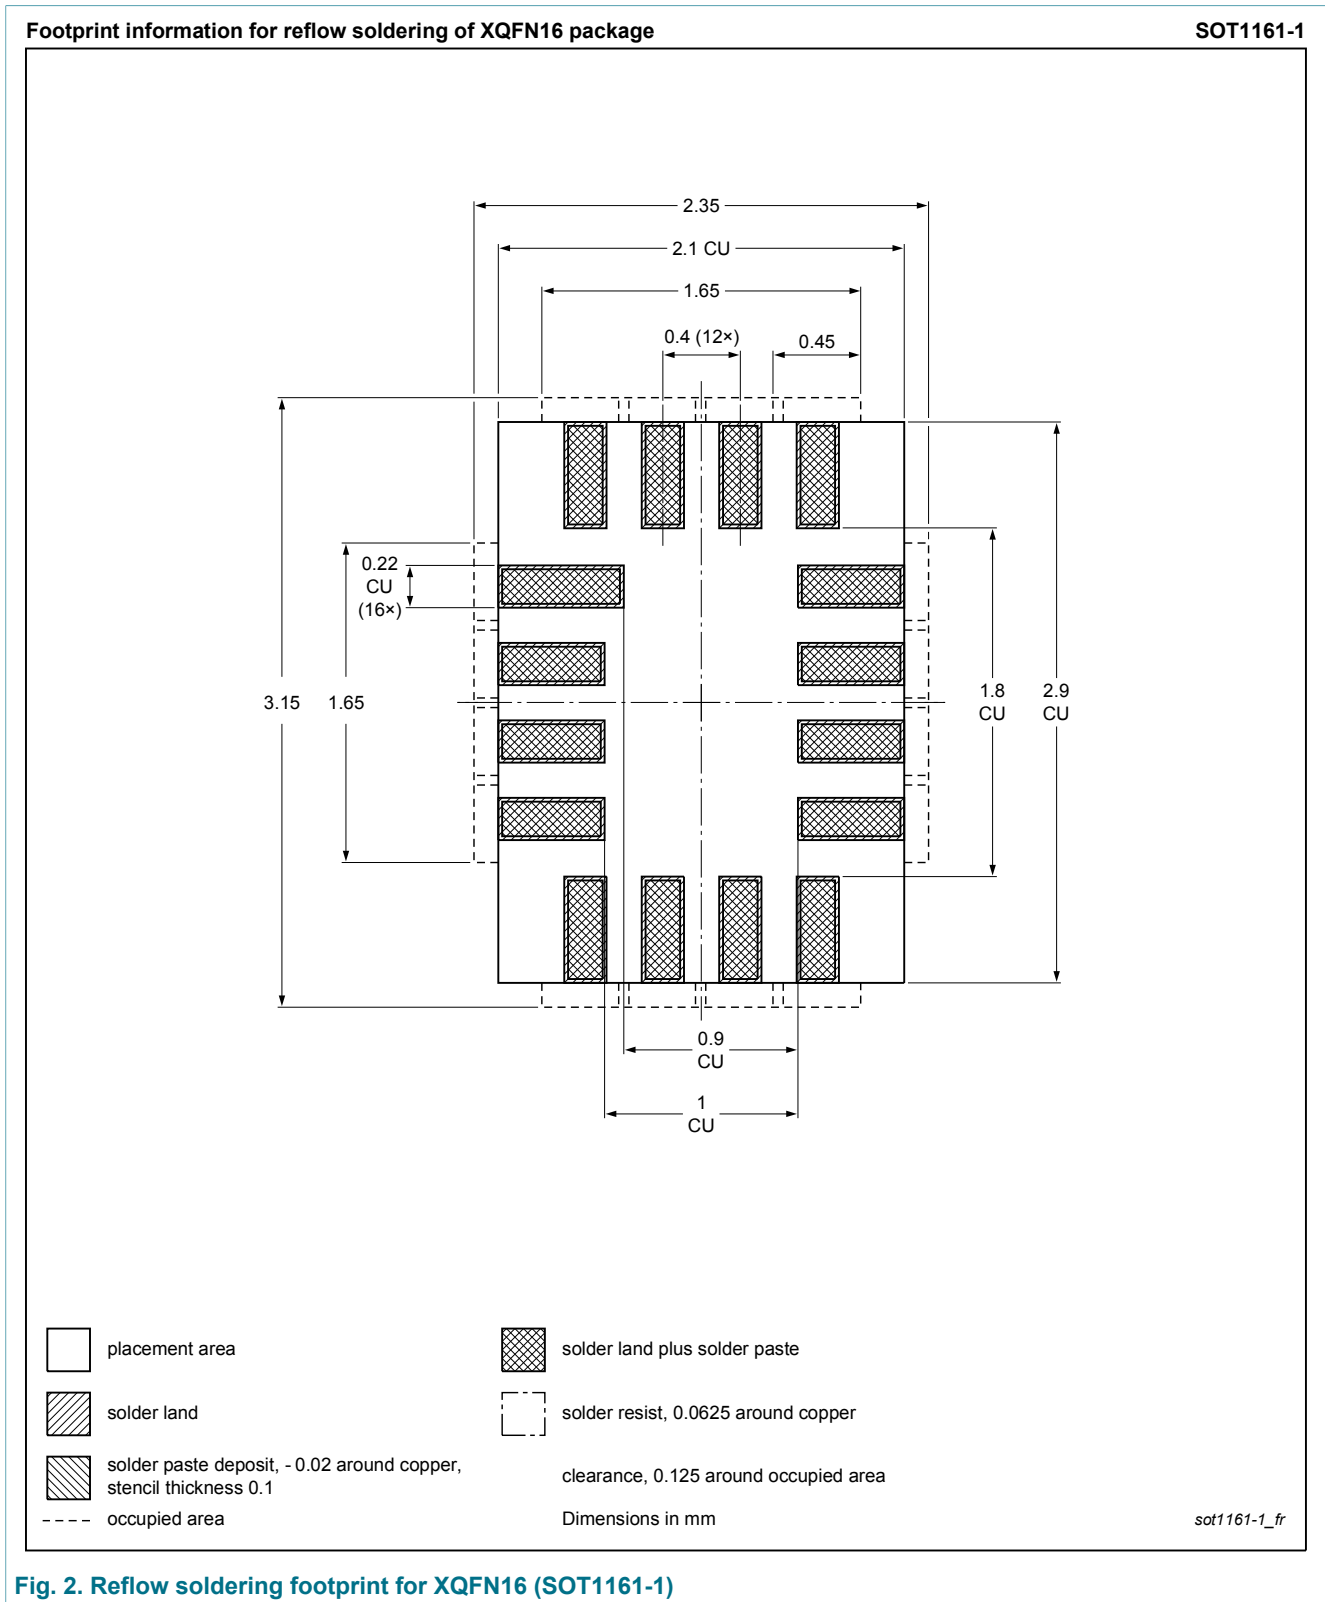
Reflow soldering footprint for XQFN16 (SOT1161-1)
